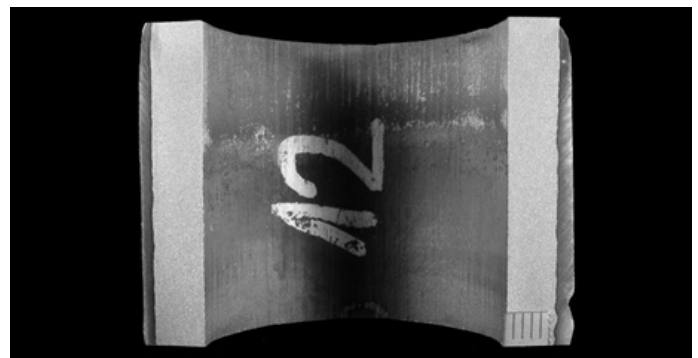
Macrostructure of the tube (ϕ 44.5 x 5.0) mm made of steel 13CrMo4-5 with the one-layer overlay weld made of nickel alloy Inconel 625
